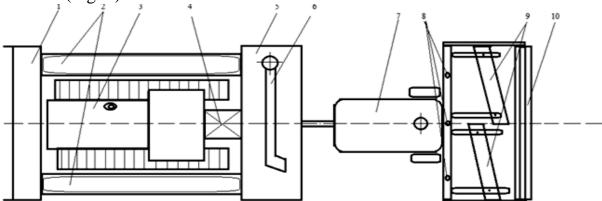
Structural scheme of the Grain complex:1 - grain reaping machine; 2 - rotor threshing machines; 3 - crawler tractor; 4 - coupling; 5 - grain tank; 6 - grain auger; 7 - container for liquid organic fertilizers; 8 - injector; 9 - heavy disk harrow; 10 - slat roller.
